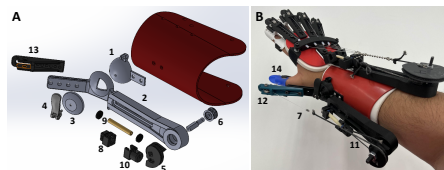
Modular Thumb Support Design - Exploded and Assembled Views. (A) Exploded view displaying internal structure: base (1), central (2), and two (3) spherical joint layers; cam handle (4); series cam piece (5); ball bearings (6); fixed spring mount (8); rubber spring with end caps (9); fixed spring mount (10); and pulley support arm (13). (B) Assembled device mounted on the hand orthosis, also showing Cable A (7), Cable B (11), pulley (12), and Thumb cap with Velcro straps (14).
